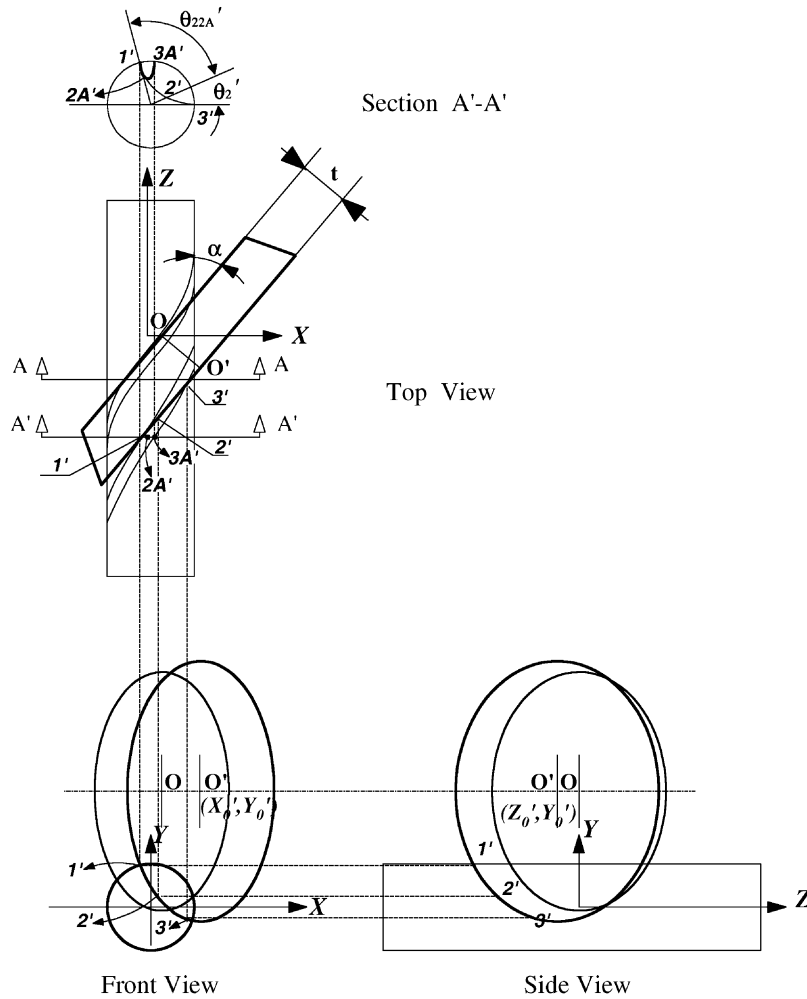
Schematic illustration of helical groove operation with finite wheel thickness.
